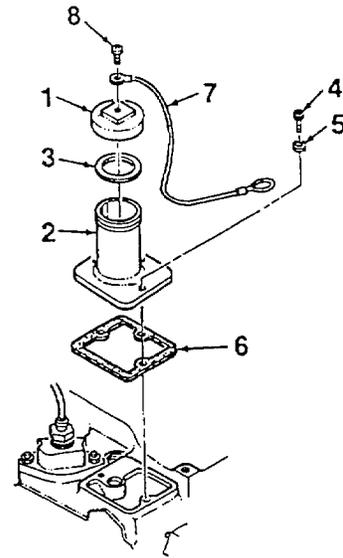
Oil Fill Tube (Sheet 2 of 2)
